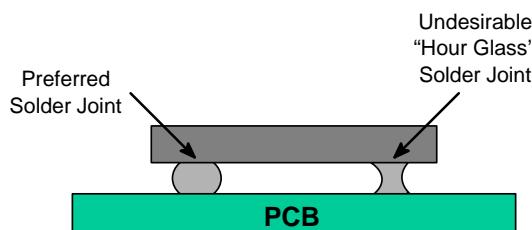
Side View of QFN Attachment Illustrating Preferred and Undesirable Solder Joint Shapes
